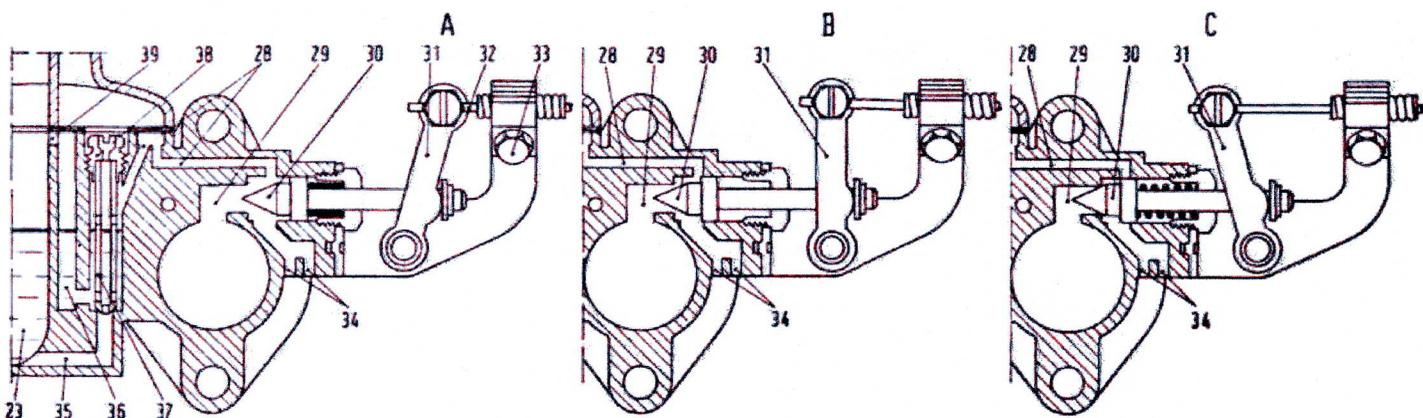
Diagrammatic section views of 26 OC Weber carburetor through the starting device.
